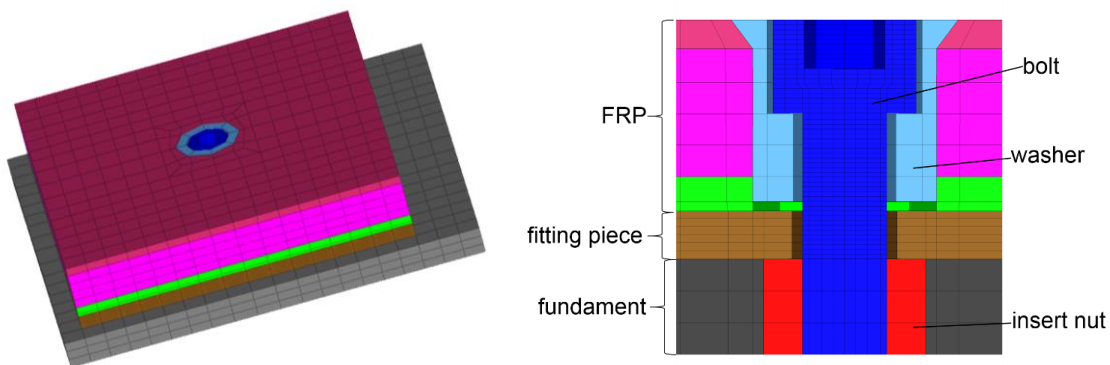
Example for a bolted joint connection. Full model (left) and section-cut view (right).
